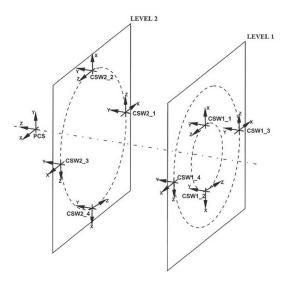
Adjustment coordinate system on workpiece side (exemplarily)
